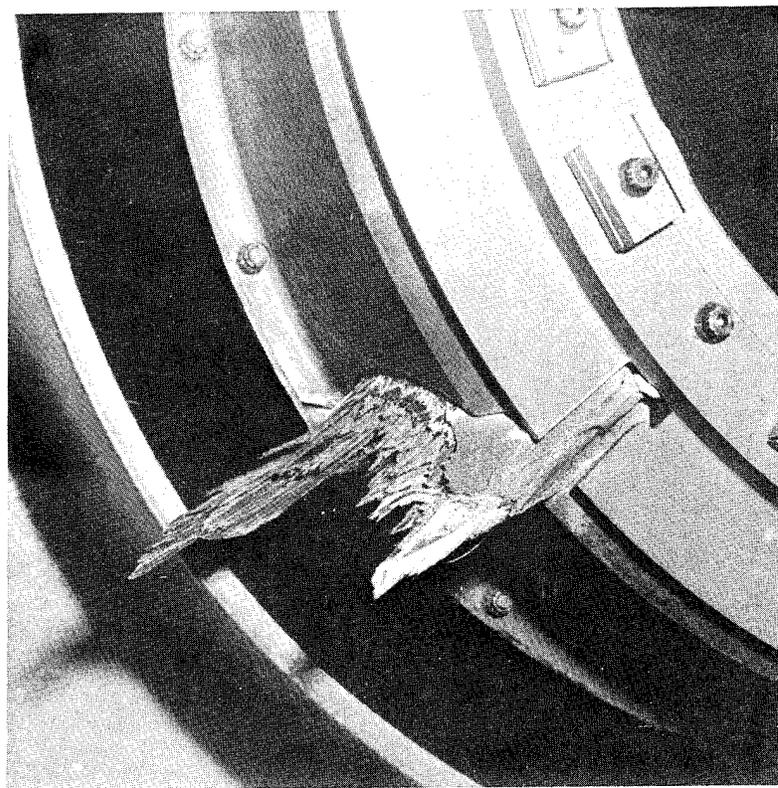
Dye Penetrant Inspection of Dovetail
